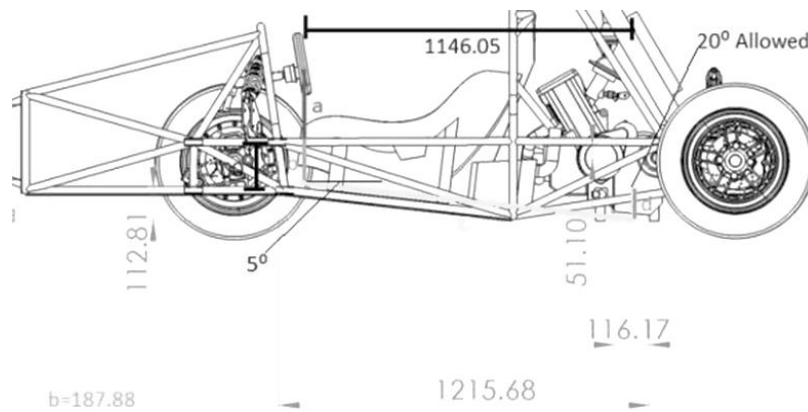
Fixed geometric dimensions of the shifter mechanism
